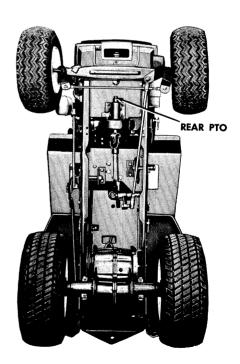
REAR PTO SHOWN WITH DRIVE SHAFT ATTACHED
